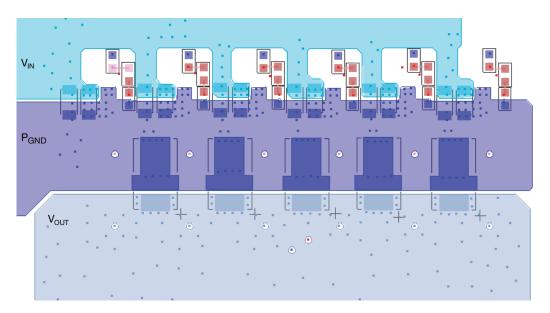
Multi - Phase VRPower Layout Bottom View
